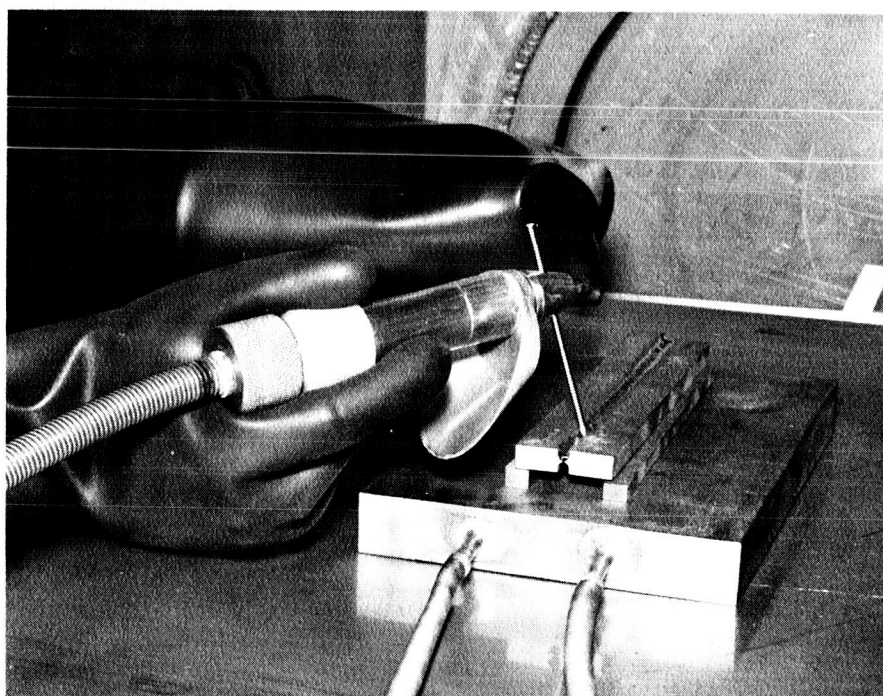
Weld Chamber Internals Set-Up for Plate Welding. Baffled Convection Heat Exchanger
